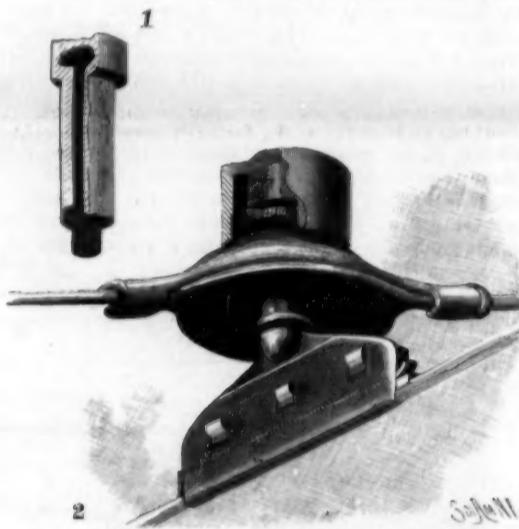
TROLLEY WIRE SUPPORT AND INSULATOR.
